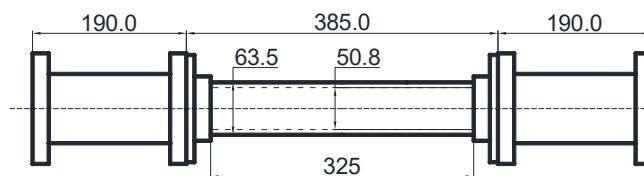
Test section: 1. polyethylene tubes, 2. tube with metal foam, 3. aluminum flanges for connecting the metal foam to the polyethylene tubes (all dimensions are in millimeters).
